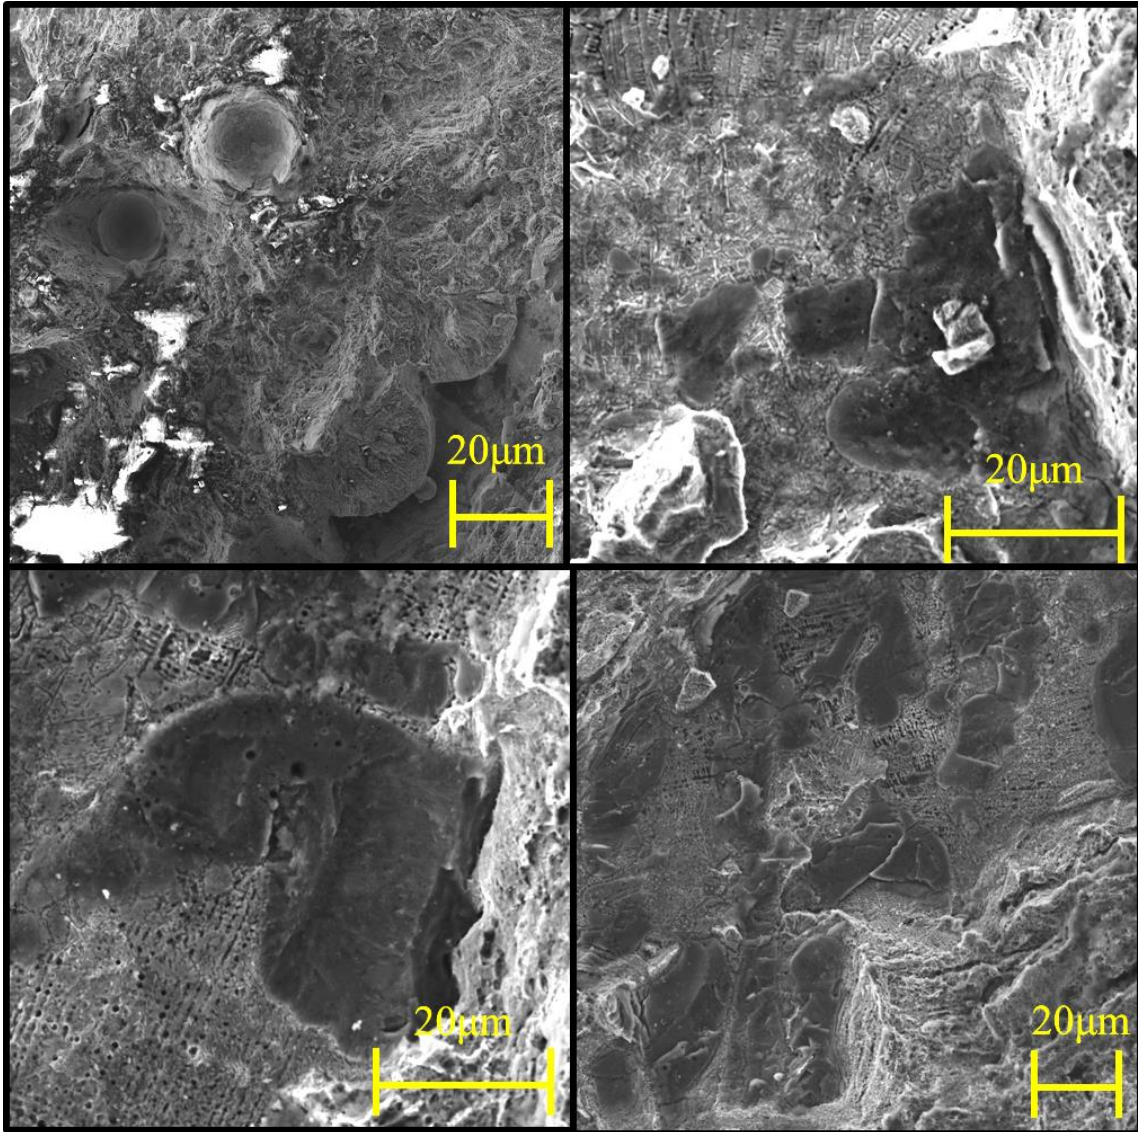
Fractography of SLM+EBW sample 16A/B (209.6 J/mm) fractured in the base metal
